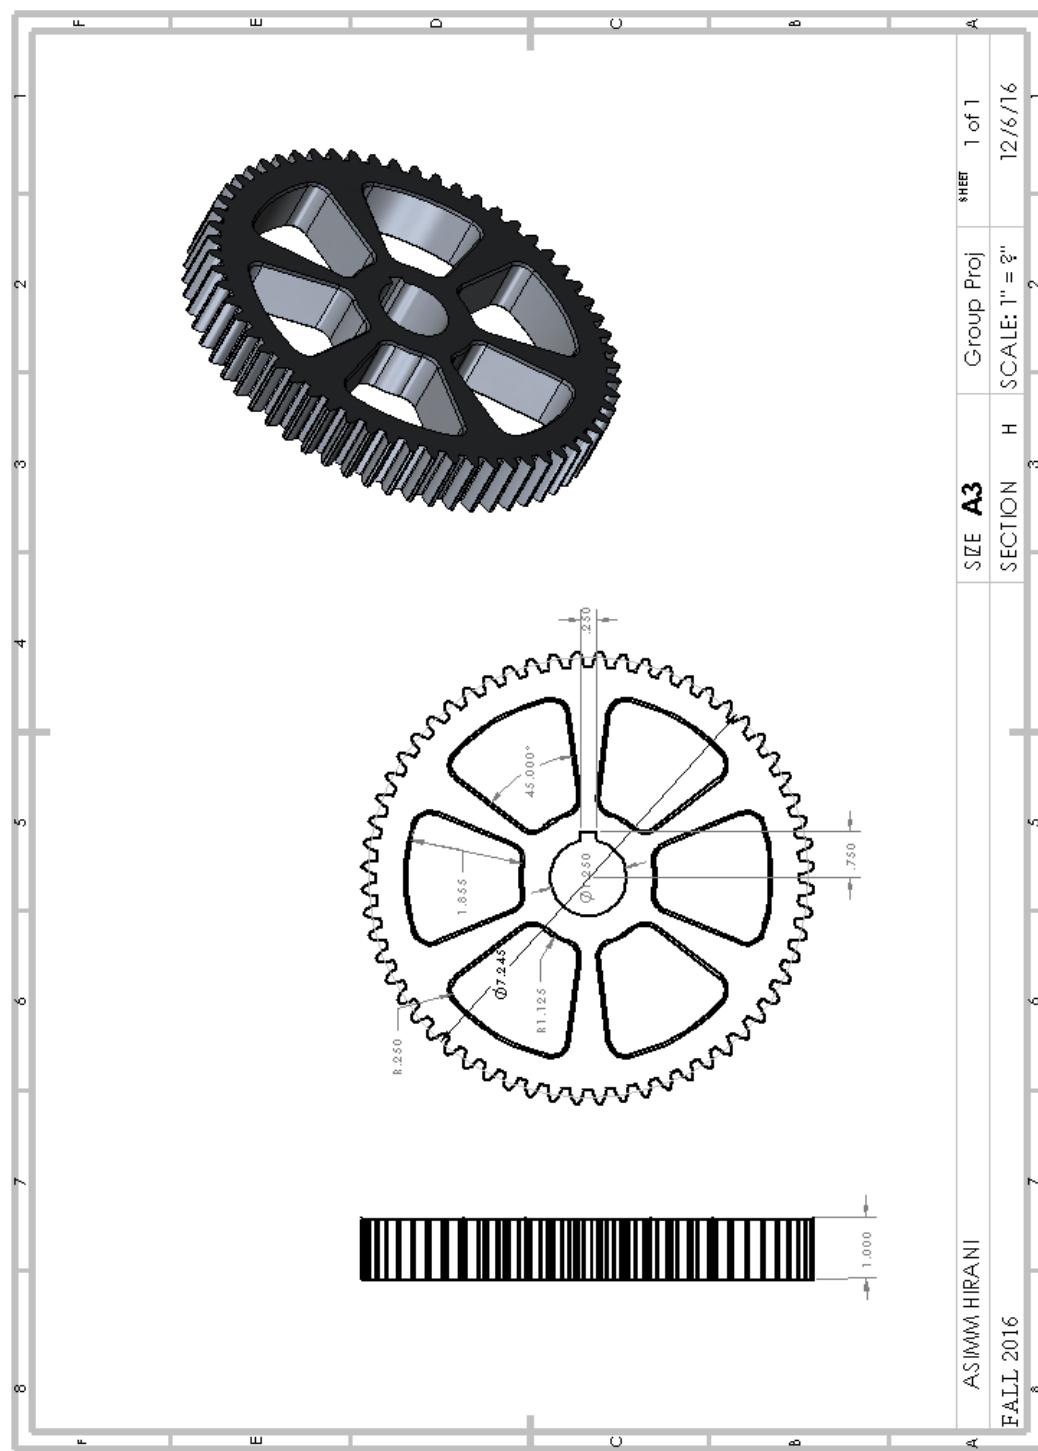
Hirani, Asimm: 60 Tooth Gear
